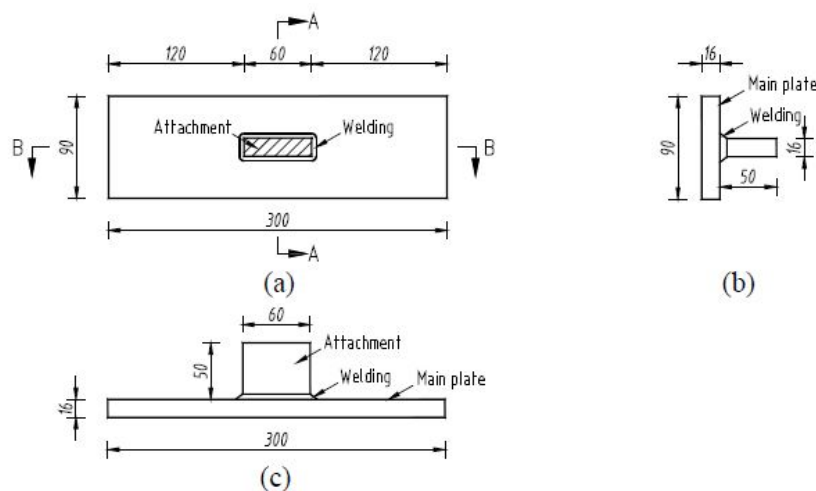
Geometry of the investigated welded steel joint (all dimensions in millimetre): (a) top view of the specimen (b) section A-A (c) section B-B [54]
